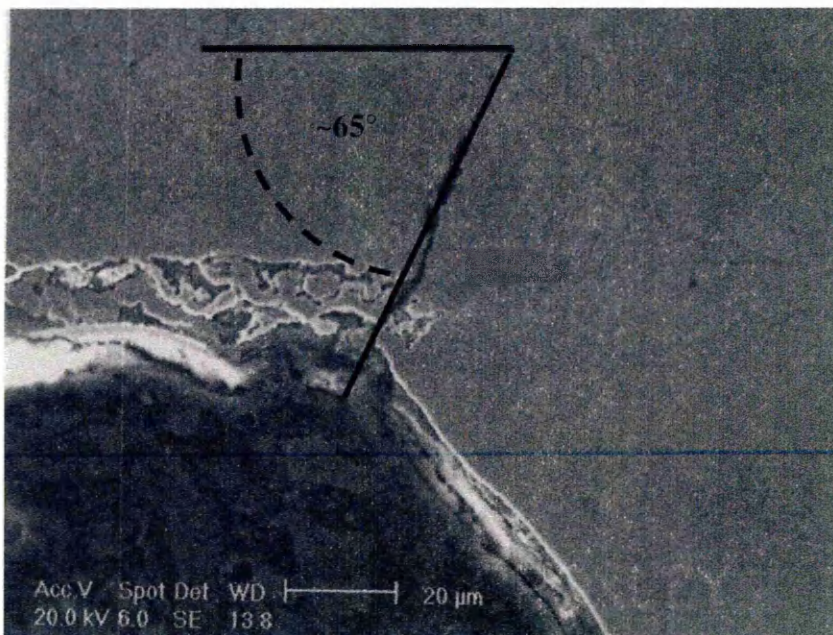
Secondary electron image showing fatigue crack initiation in the 1.2mm V1437 from 1.2mm V1437 (top) – 1mm 2205 dissimilar metal lap joint
